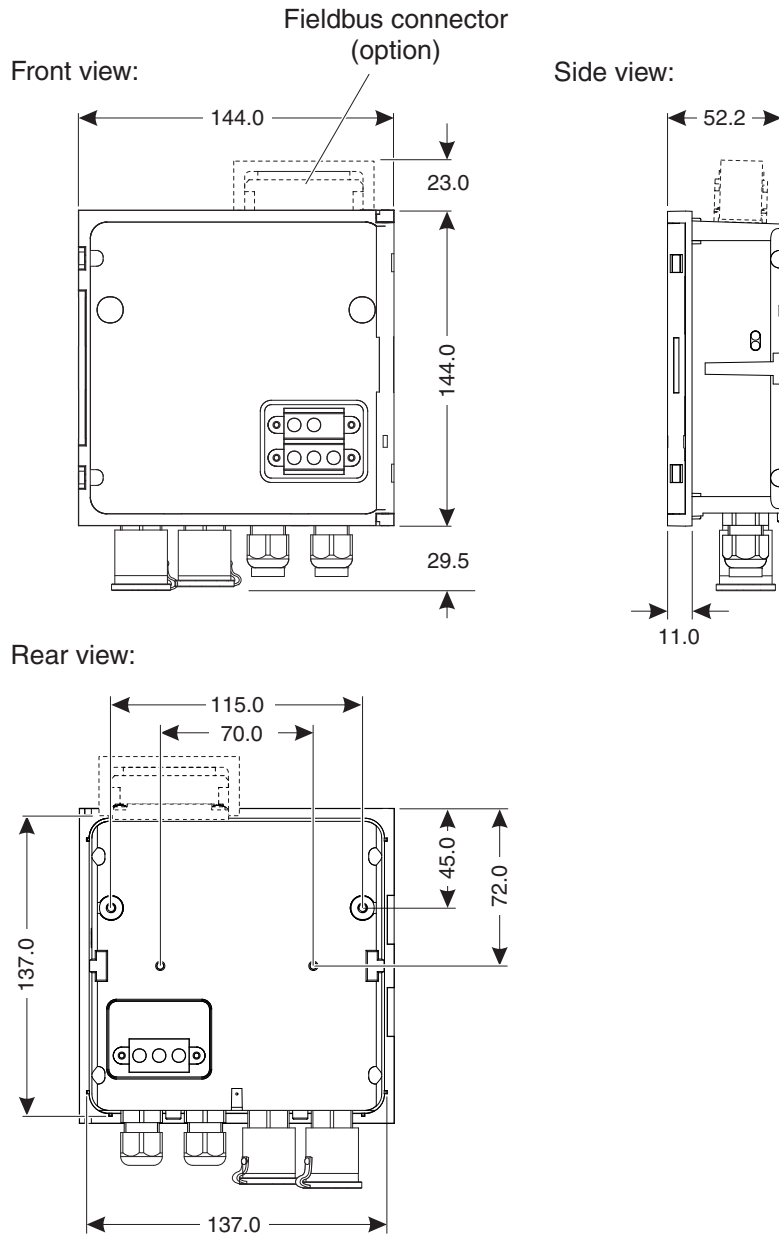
Dimension drawing of MIQ module (dimensions in mm)
